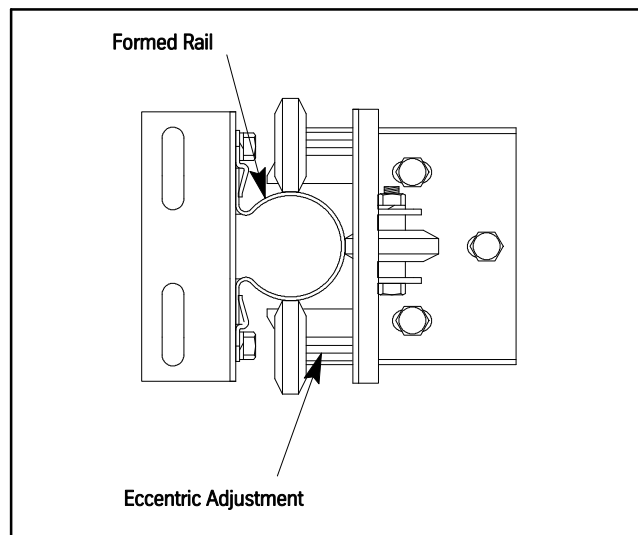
2 5/8" Roller Guide Assembly 454BR
